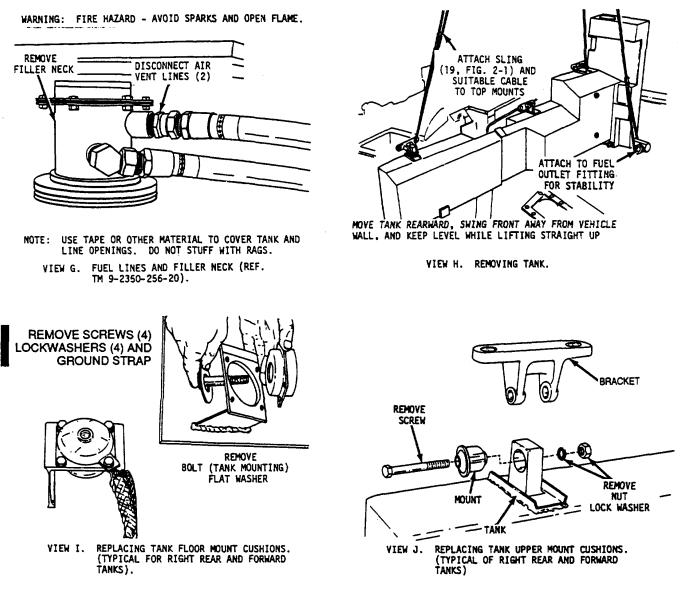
Left rear fuel tank removal and installation(Sheet2 of 2).
